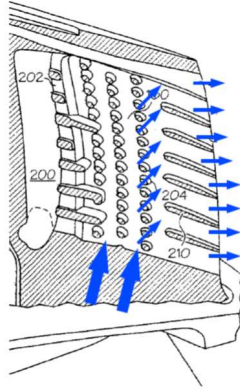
Scheme of a trailing edge cooling section with pin fins and enlarged pedestals [62]
